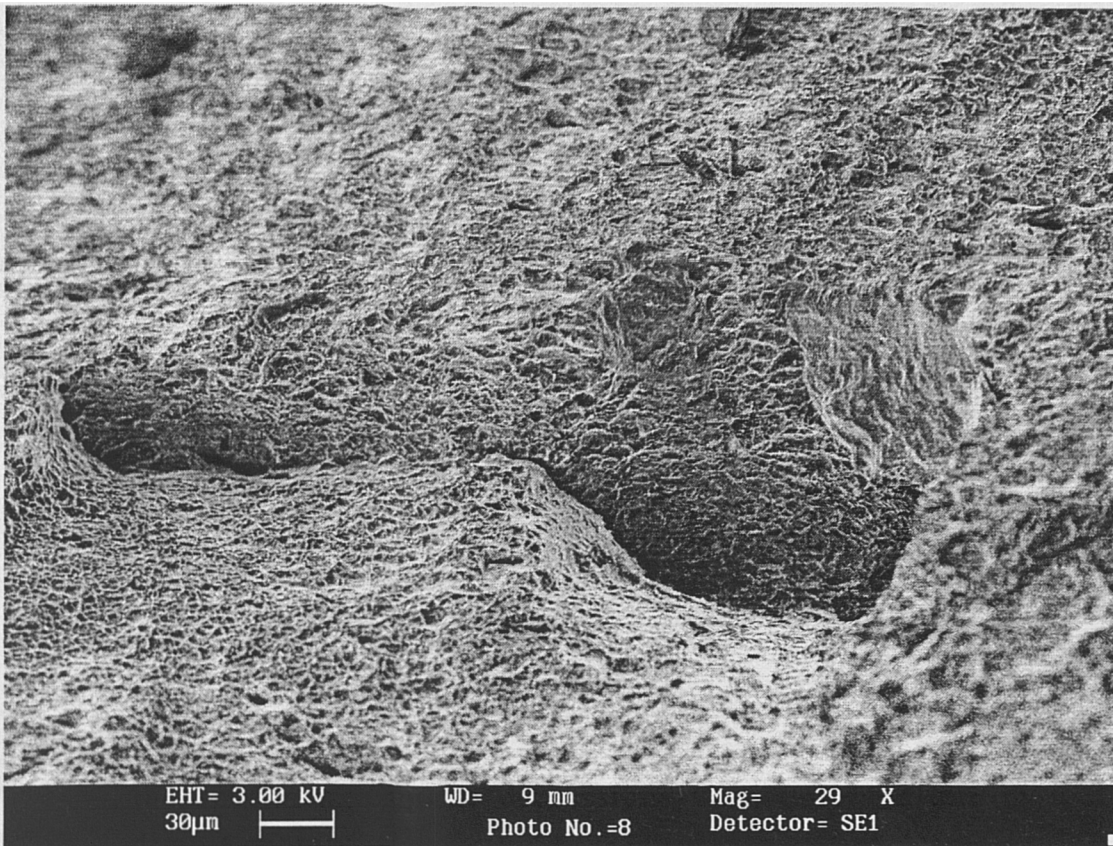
(Specimen 6302, current 100 A, speed 4.2 mms^{-1}) A low magnification view of the fracture surface of the specimen. Cuplike depressions were observed due to dimple rupture.
